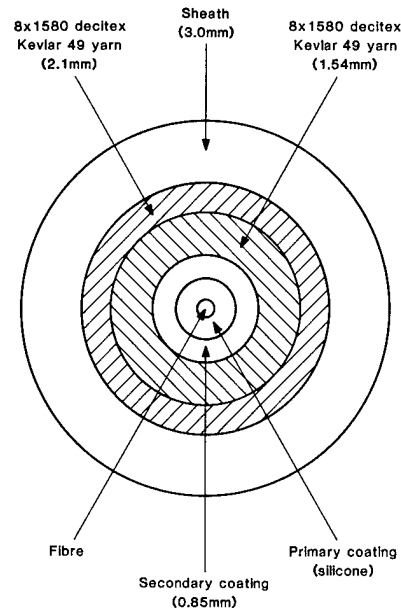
Kevlar cable cross-section (served and parallel designs)
